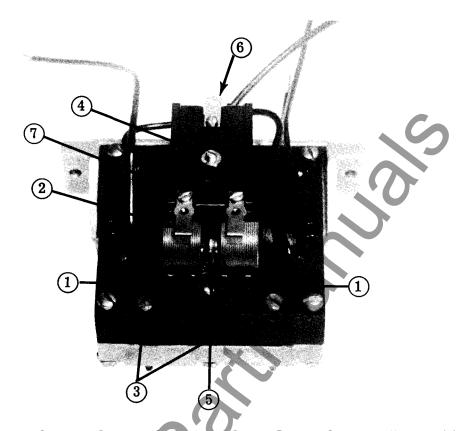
Directional Unit. 1 — Stationary Contacts. 2 — Stationary Contact Pressure Spring. 3 — Magnetic Adjusting Plugs. 4 — Upper Bearing Screw. 5 — Moving Contact. 6 — Spring Adjuster Clamp. 7 — Current Bias Vane.
